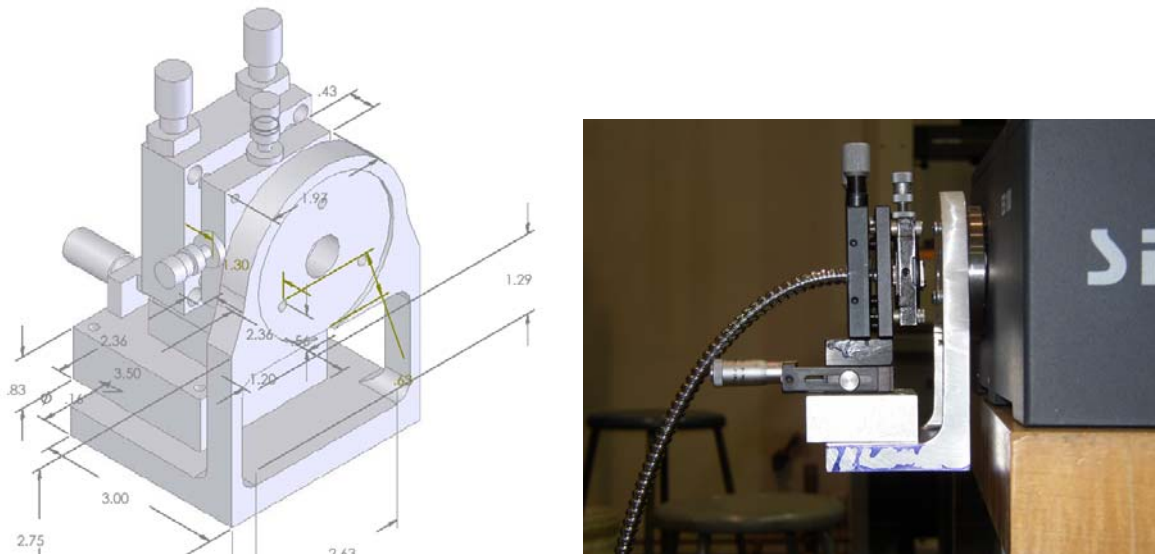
Spectrometer Fiber Connection Assembly, Model (L) and View Showing Attachment to ES-100 (R)
